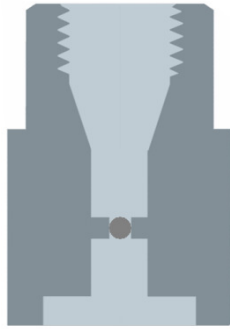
Top view of a stainless steel LWCFC fitting modified to hold a window.
